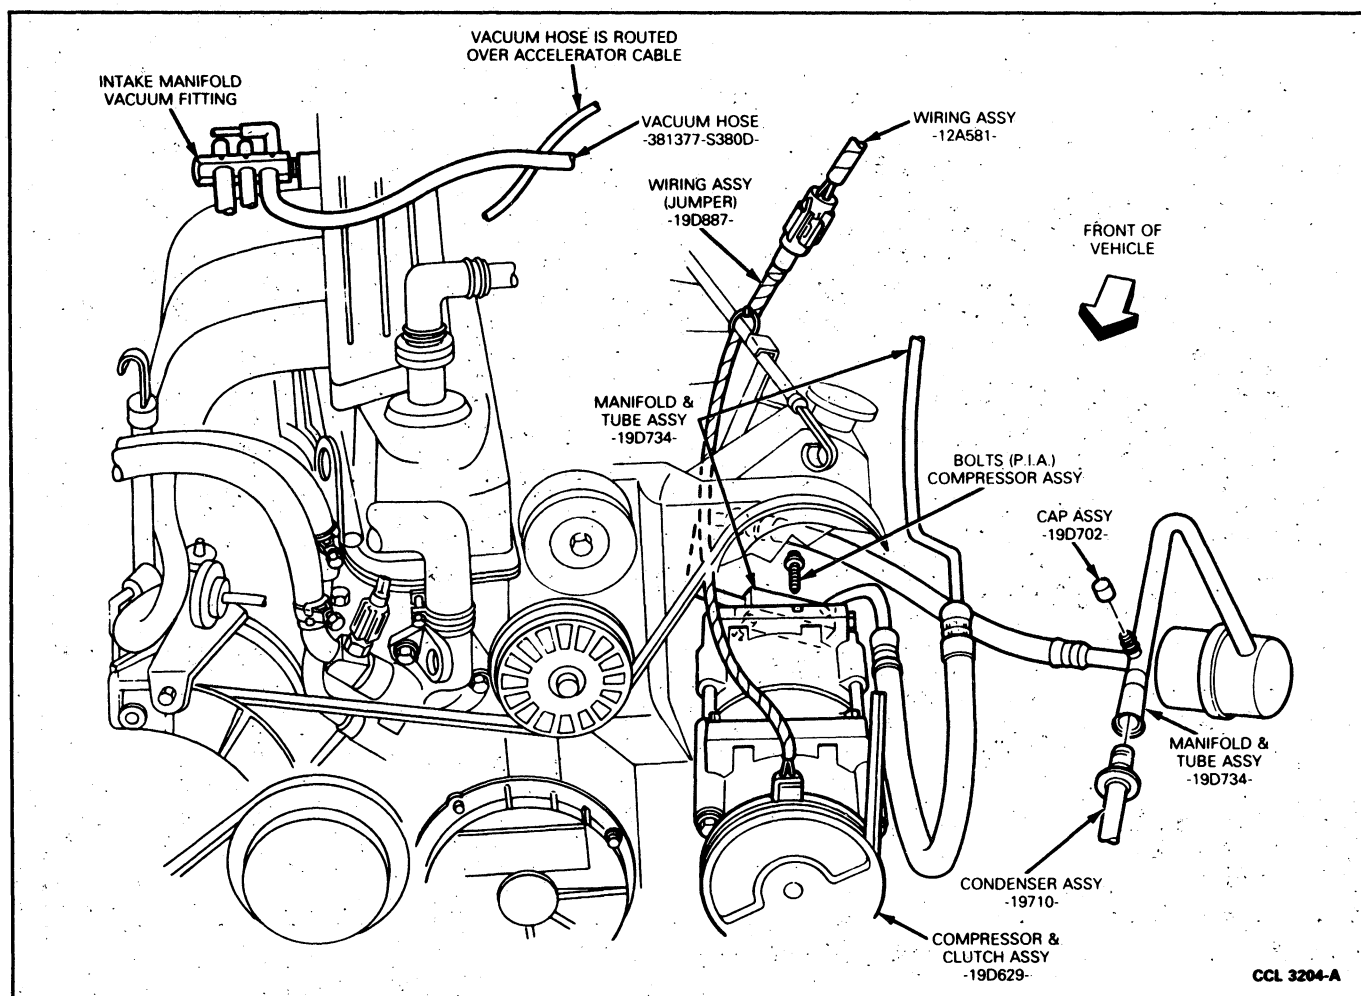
Heater Hose and A/C Line Routing—4.9L Engine
